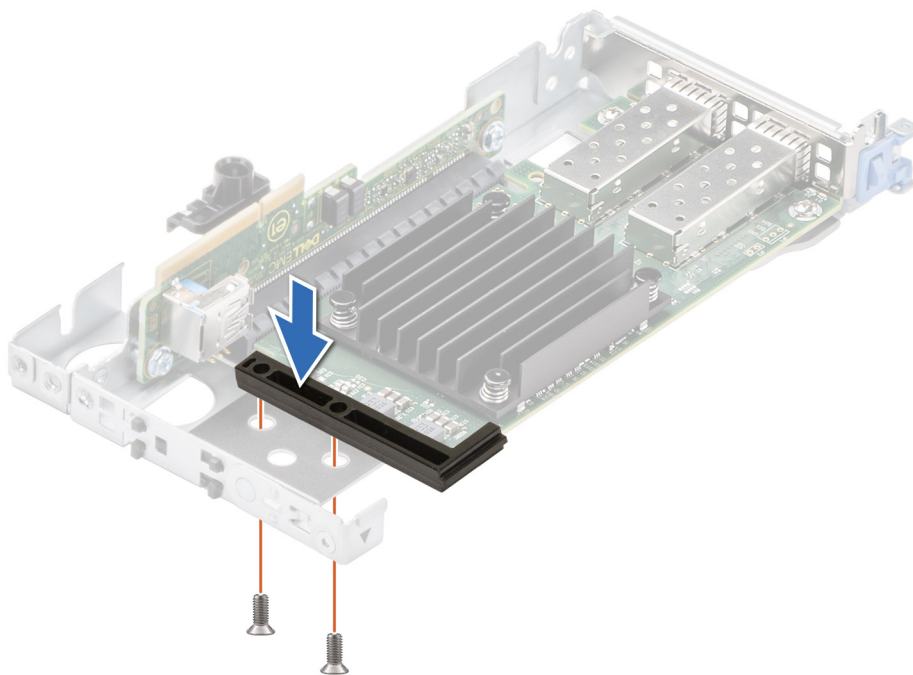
Installing the expansion card holder on riser 1 for half-length expansion cards
